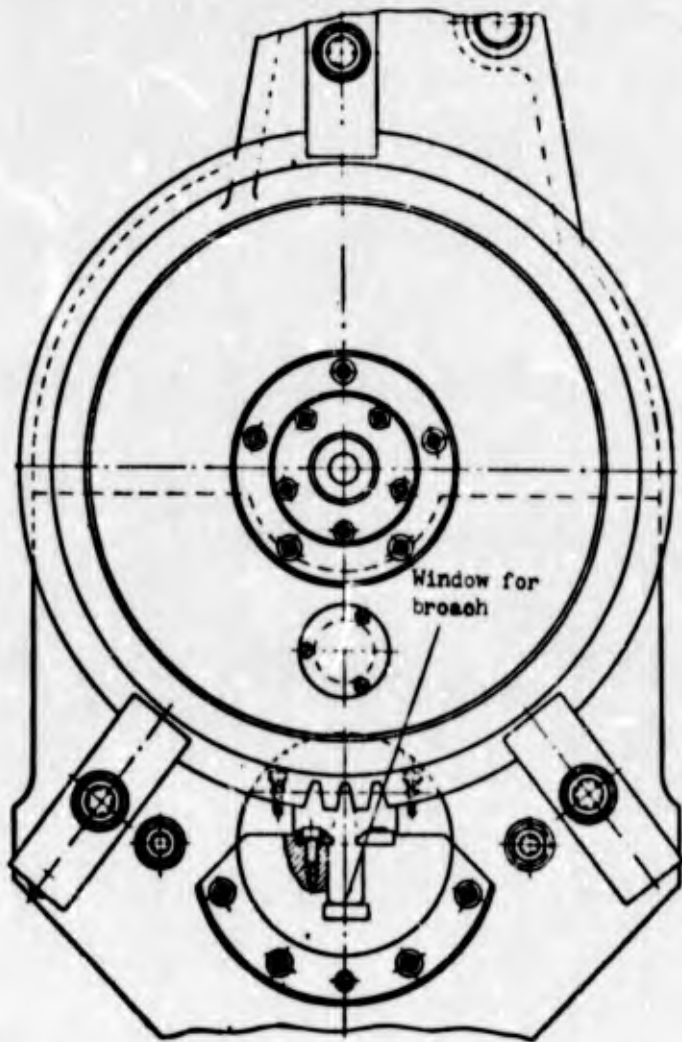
Attachment for horizontal broaching machine for broaching disk grooves.
